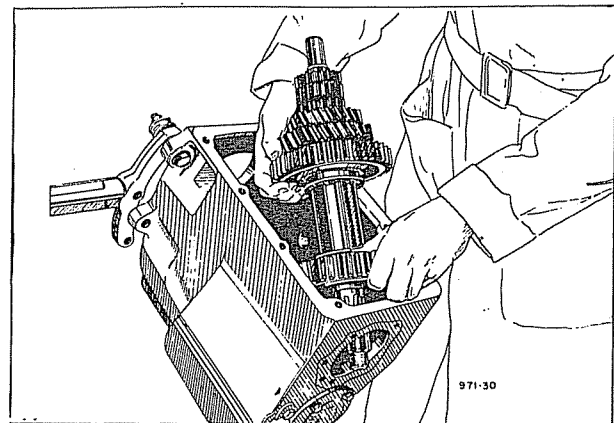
Removing Mainshaft and Gears. (Typical view).
